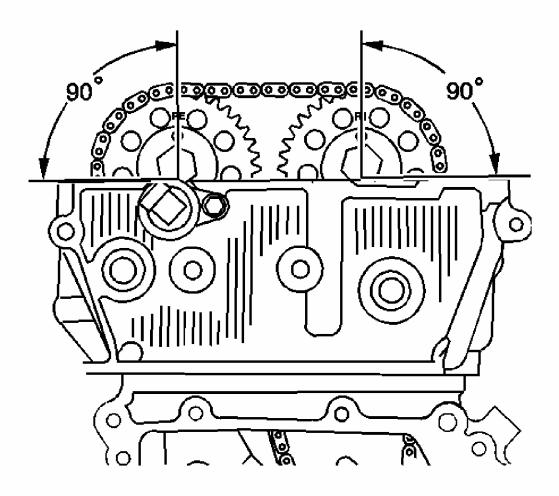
Ensuring Camshaft Sprocket Drive Pins Are At Top Of Their Rotation Courtesy of GENERAL MOTORS CORP.
